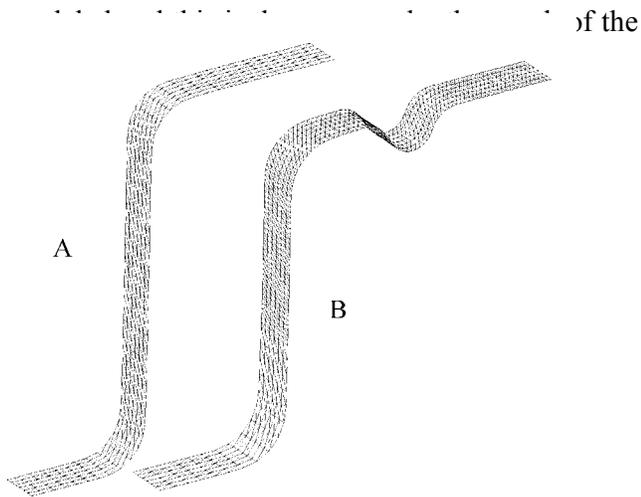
Finite element models of strip drawing with real drawbead (B) and with an equivalent drawbead (A)
